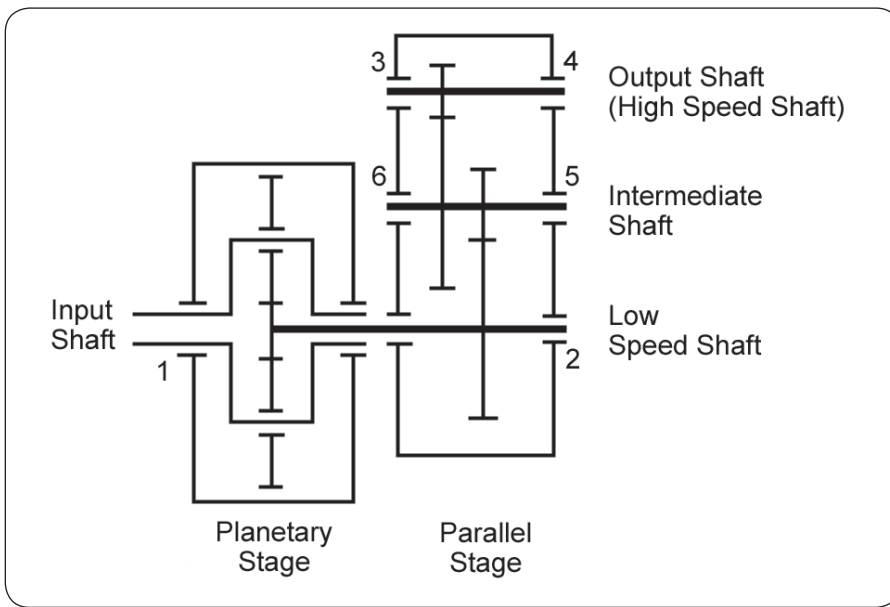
Typical wind turbine gearbox configuration with transducer locations.
